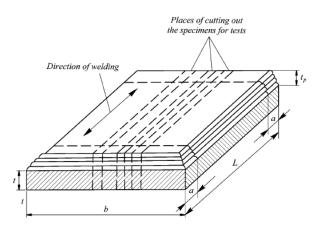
Assembly imitating cladding deposit
